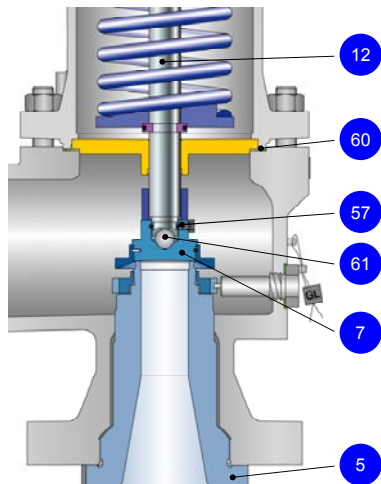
Spare parts API series 526 - Conventional Design
